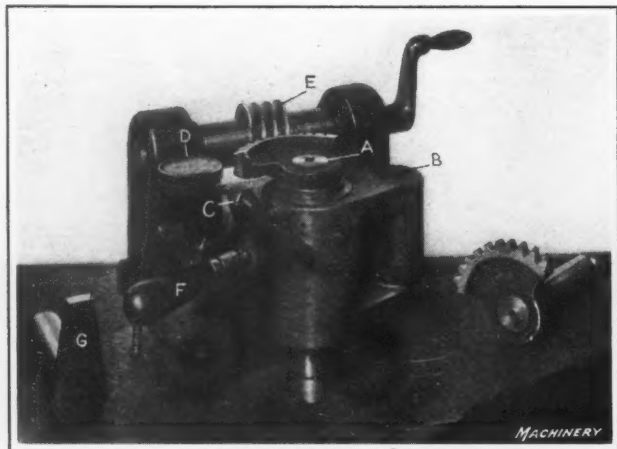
Fixture for testing the Pitch Radius of Worm-wheel Sectors for Steering Gear
